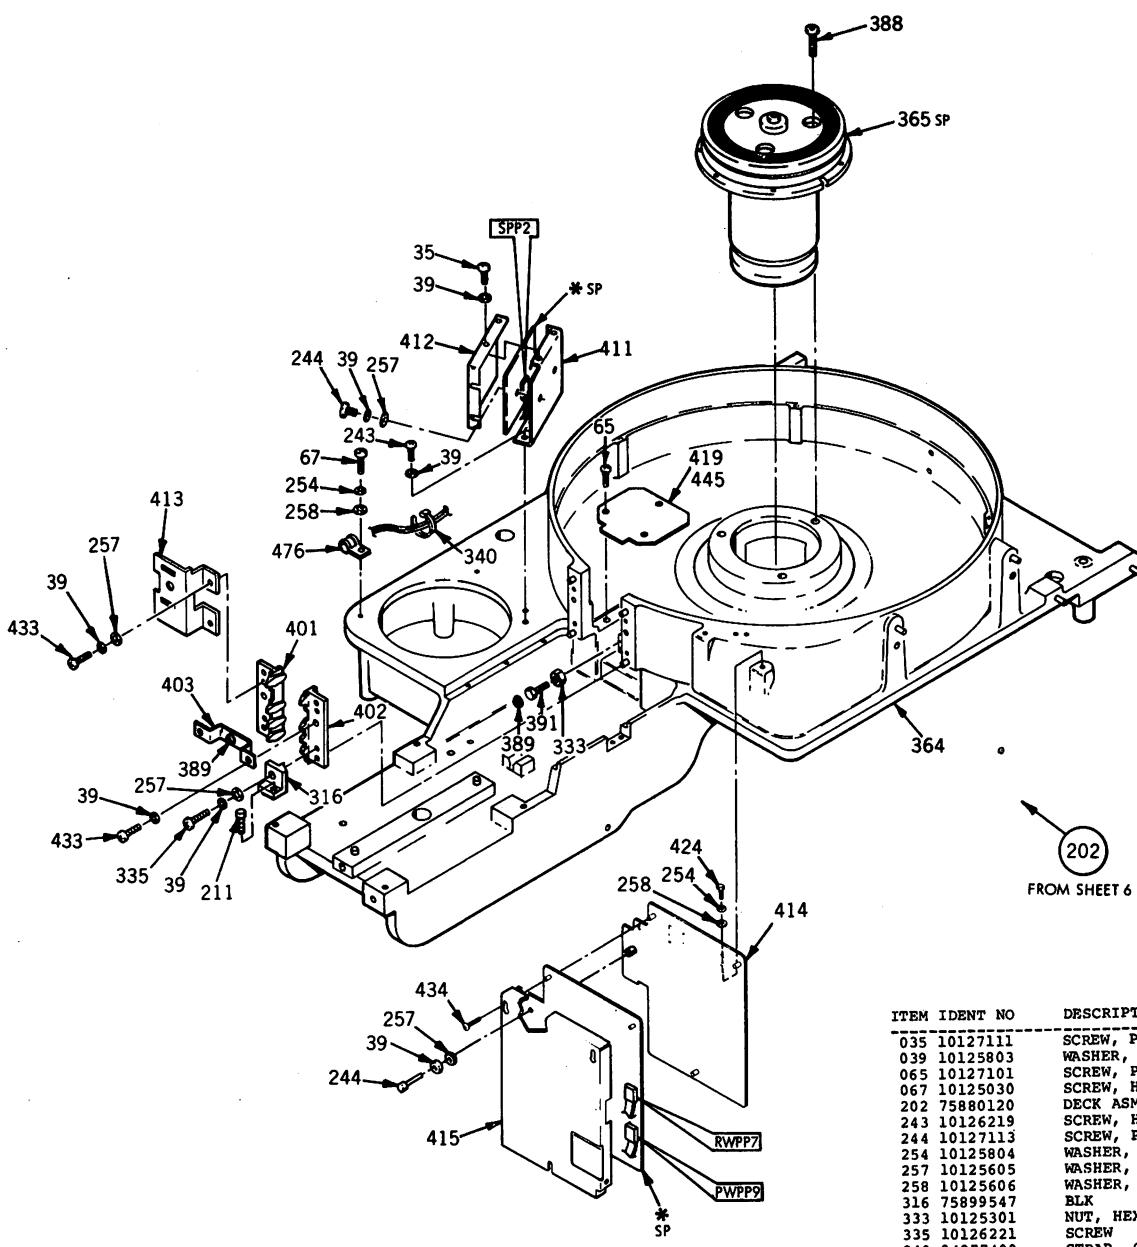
BASE PAN ASSEMBLY (SHEET 2 OF 2)
